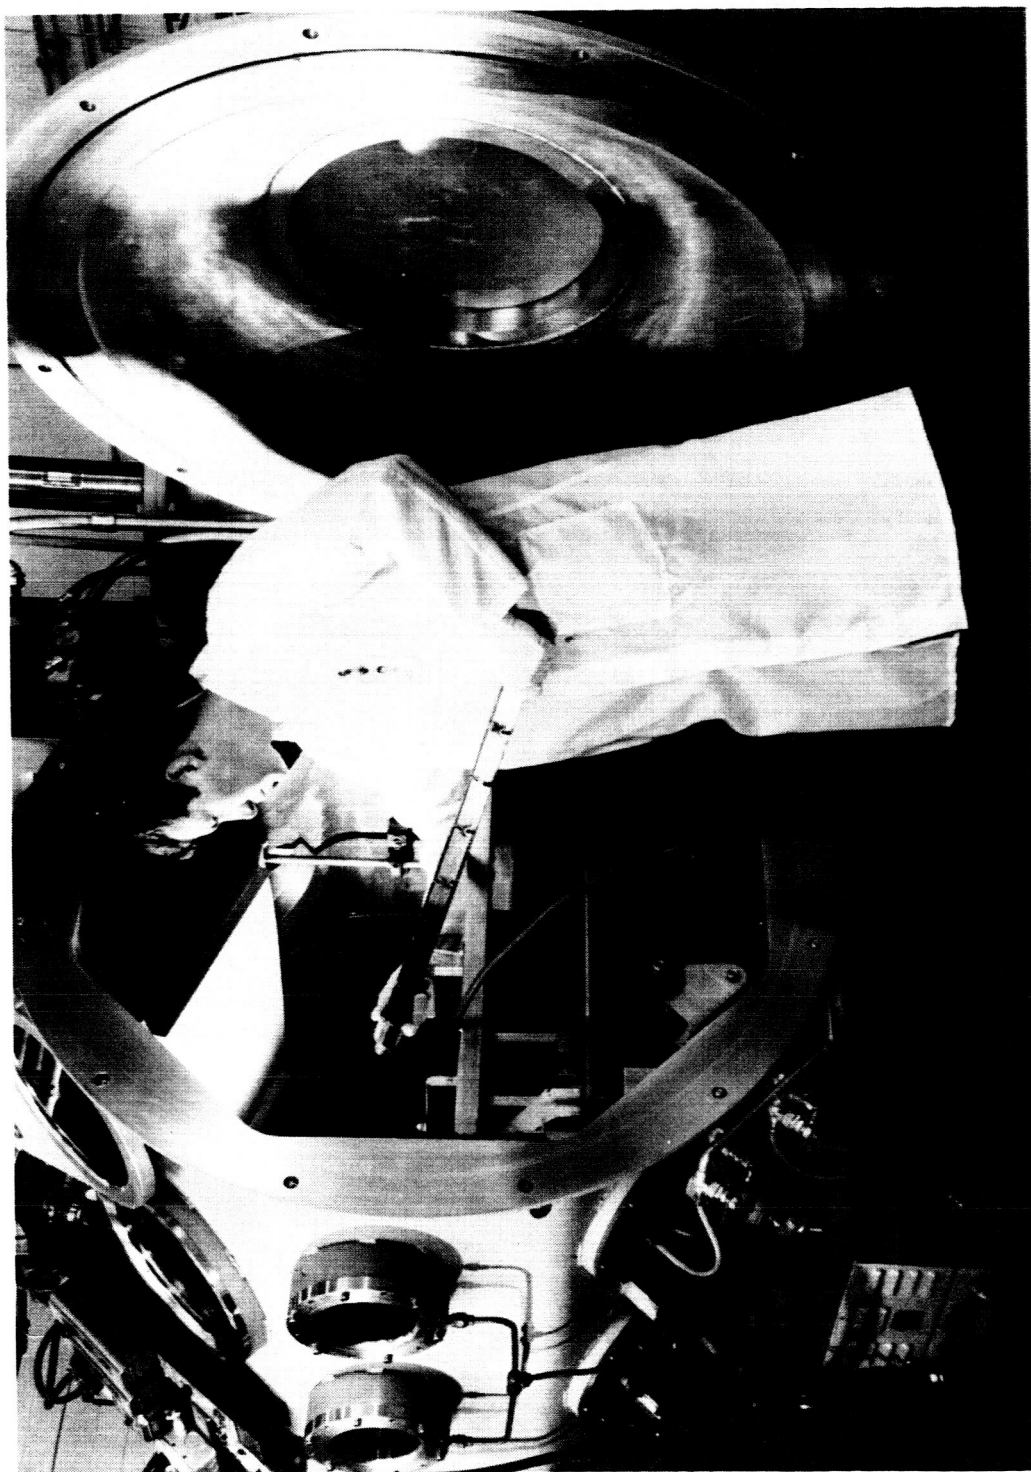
Vacuum Purged Weld Chamber
